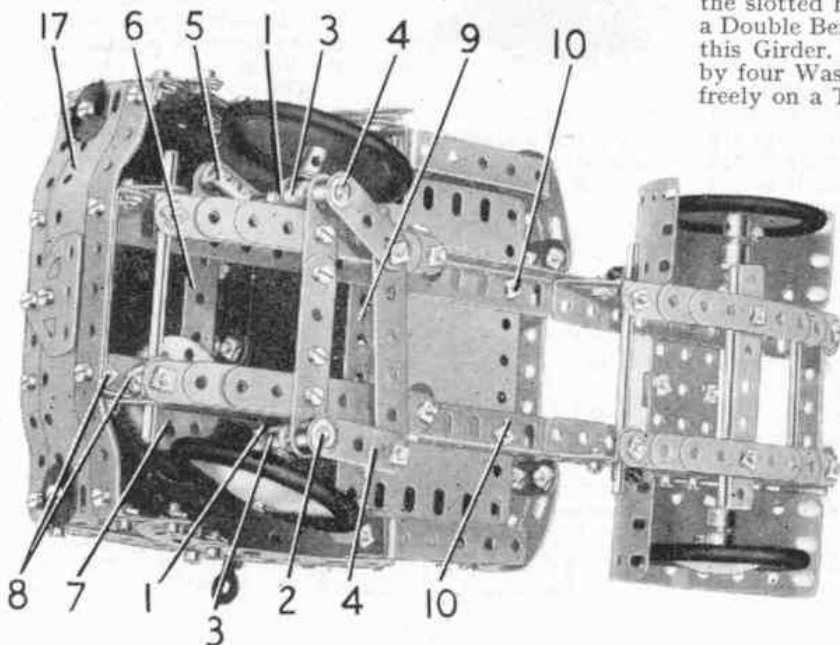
This underneath view of the lorry shows details of the springs and the steering mechanism.
